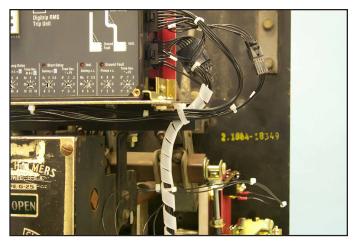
Harness Secured to the Trip Unit Mounting Plate.
